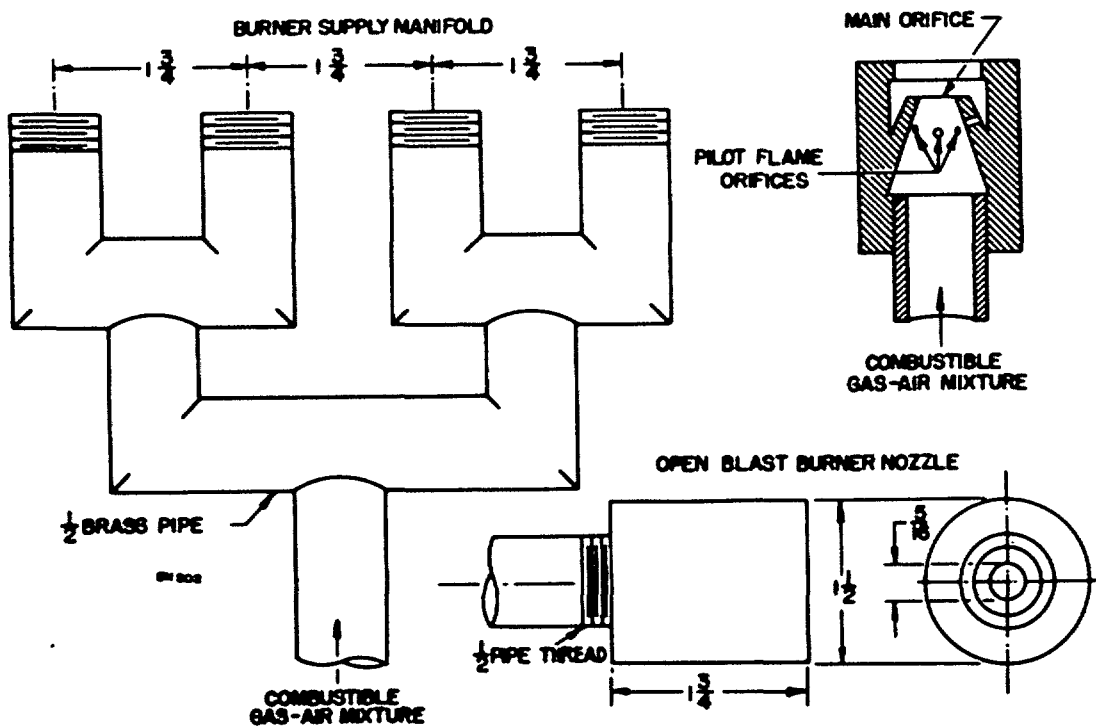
Burner supply manifold and open blast burner nozzle.
